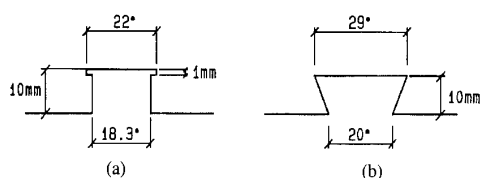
Details of the 8/6 motor: (a) Stator pole; (b) rotor pole.
